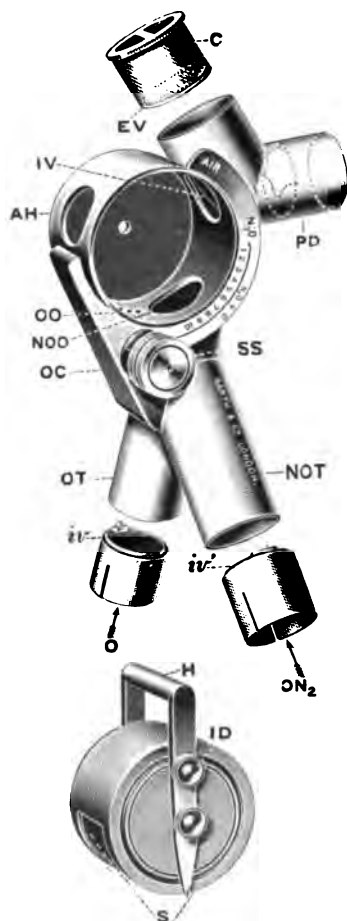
The Regulating Stopcock and Mixing-chamber shown in detail.
